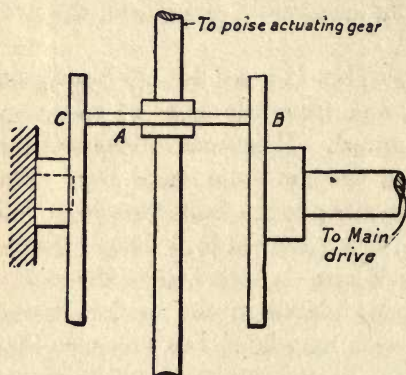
Change Speed Mechanism in Poise Gear of Riehle Testing Machine.
